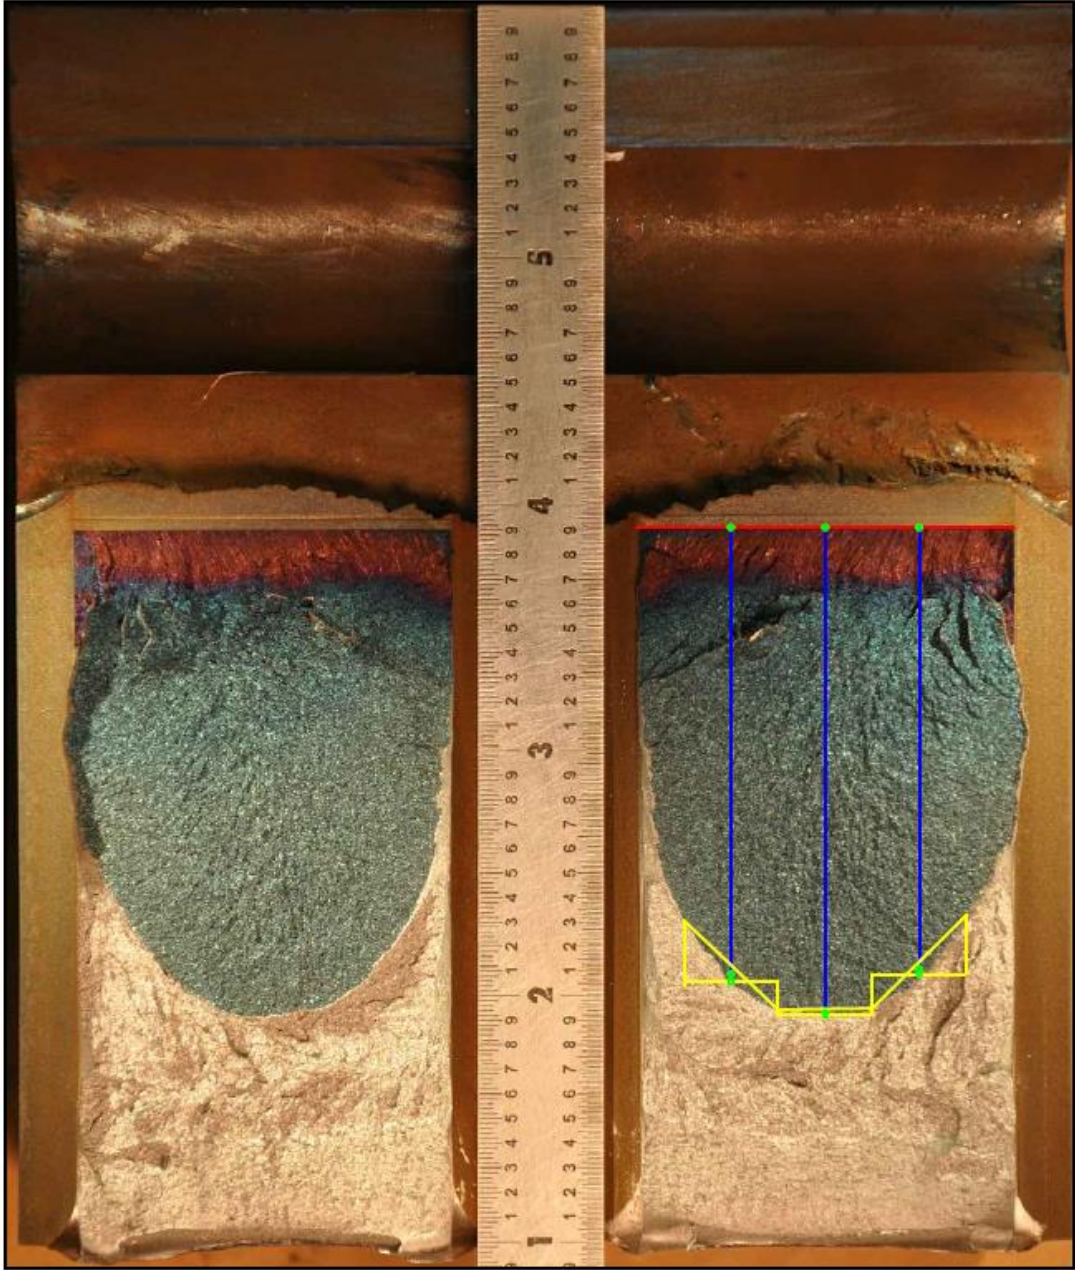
Specimen D3a Fracture Surface
